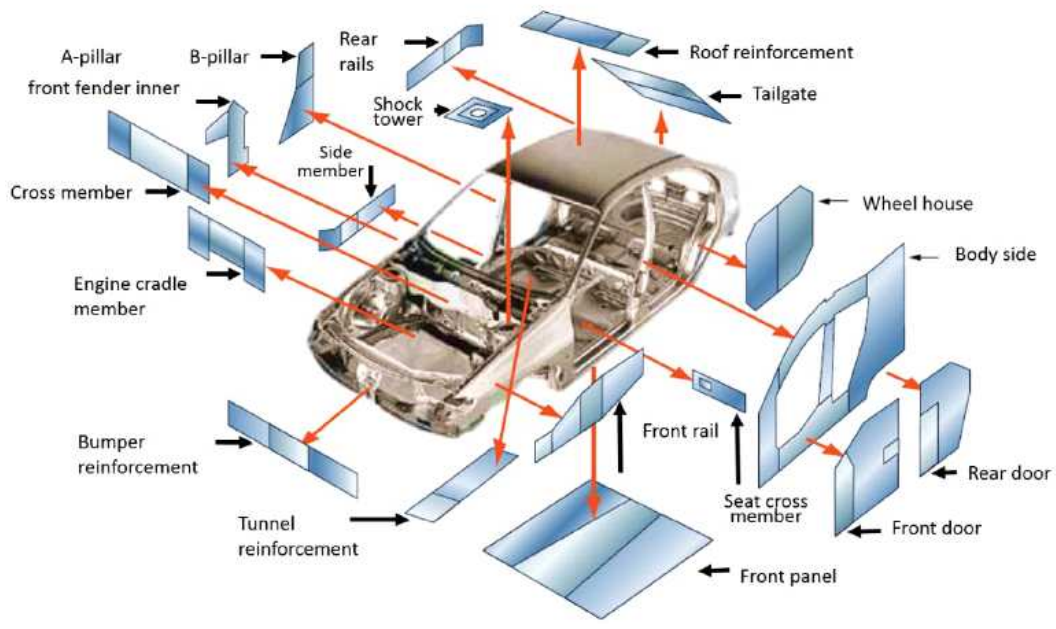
Application of tailor welded blank in a car body
